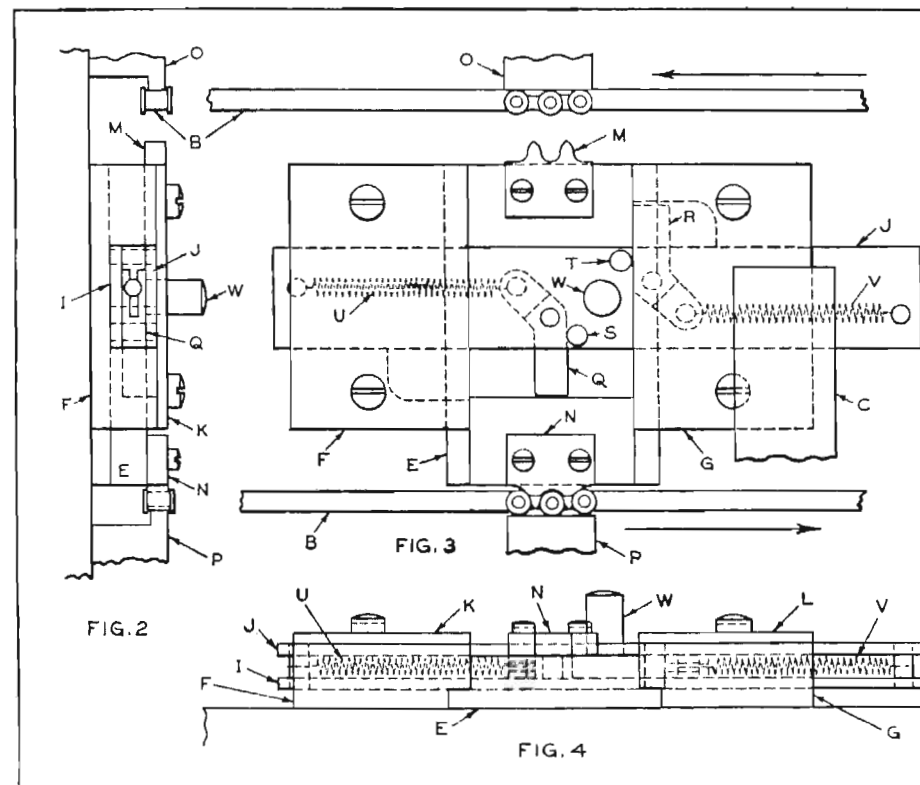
Table is Reciprocated by Alternately Engaging Toothed Dogs with Upper and Lower Portions of Driving Chain.
